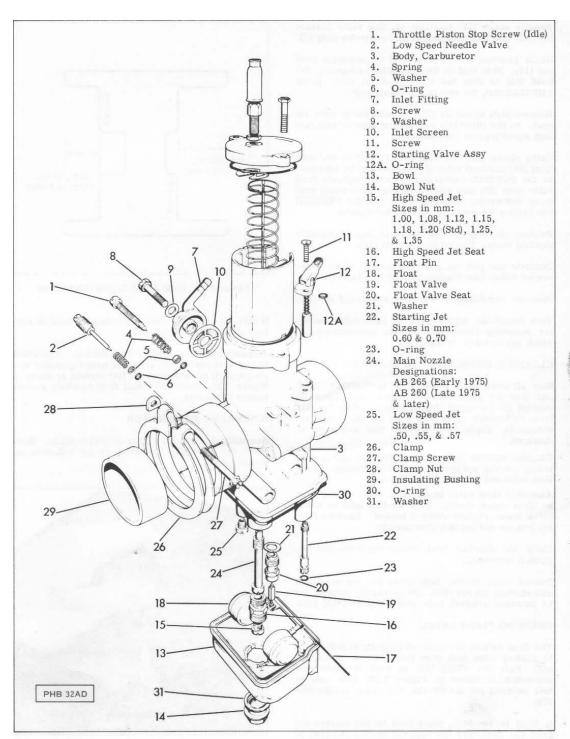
Exploded View of SS/SX-250 Carburetor
